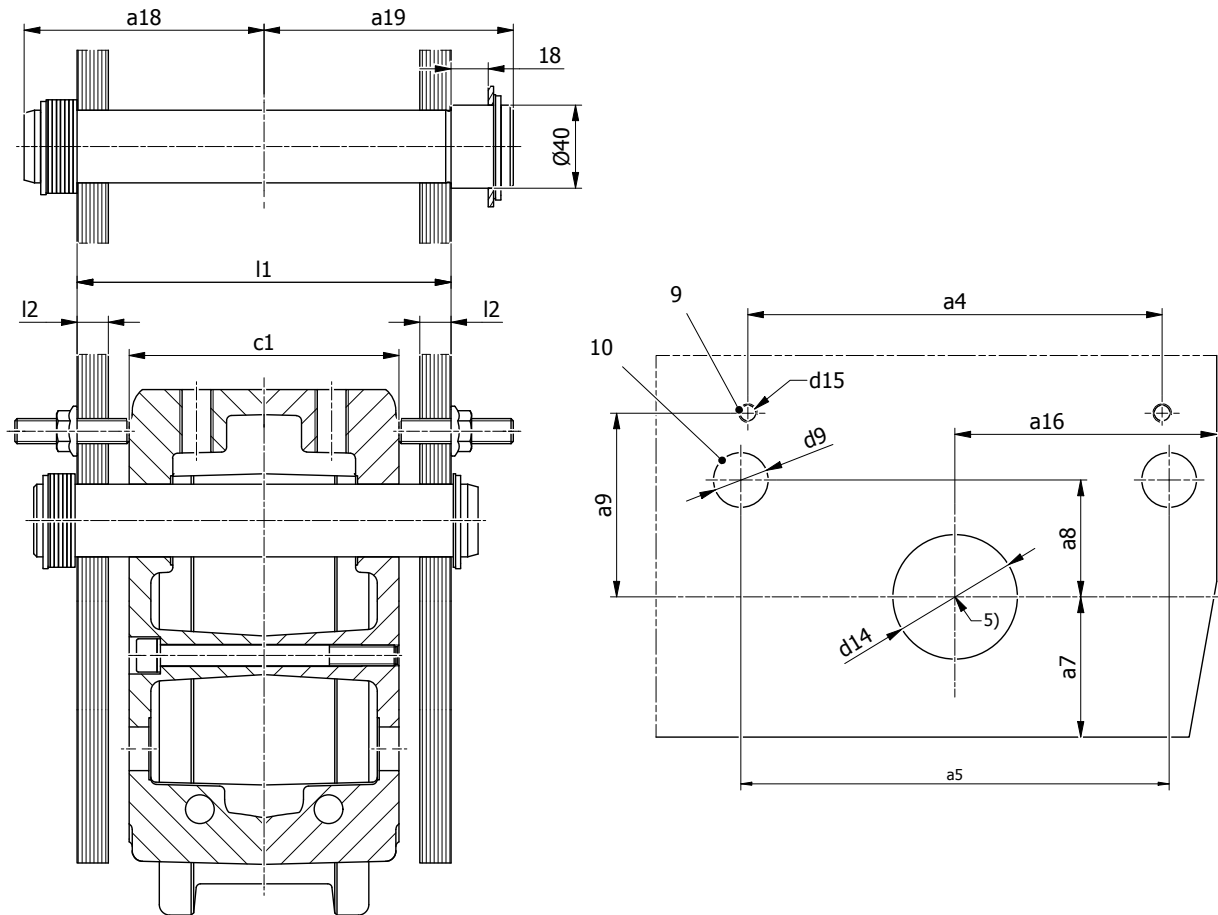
Drilling pattern for bolt connection with alignment of the mean track via socket set screw or spacer plates
